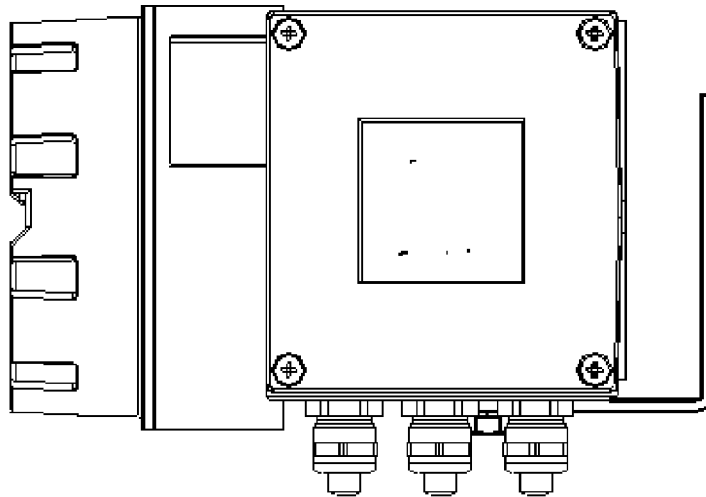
INTERMAG / TRANSMAG converter fitted to the mounting bracket
